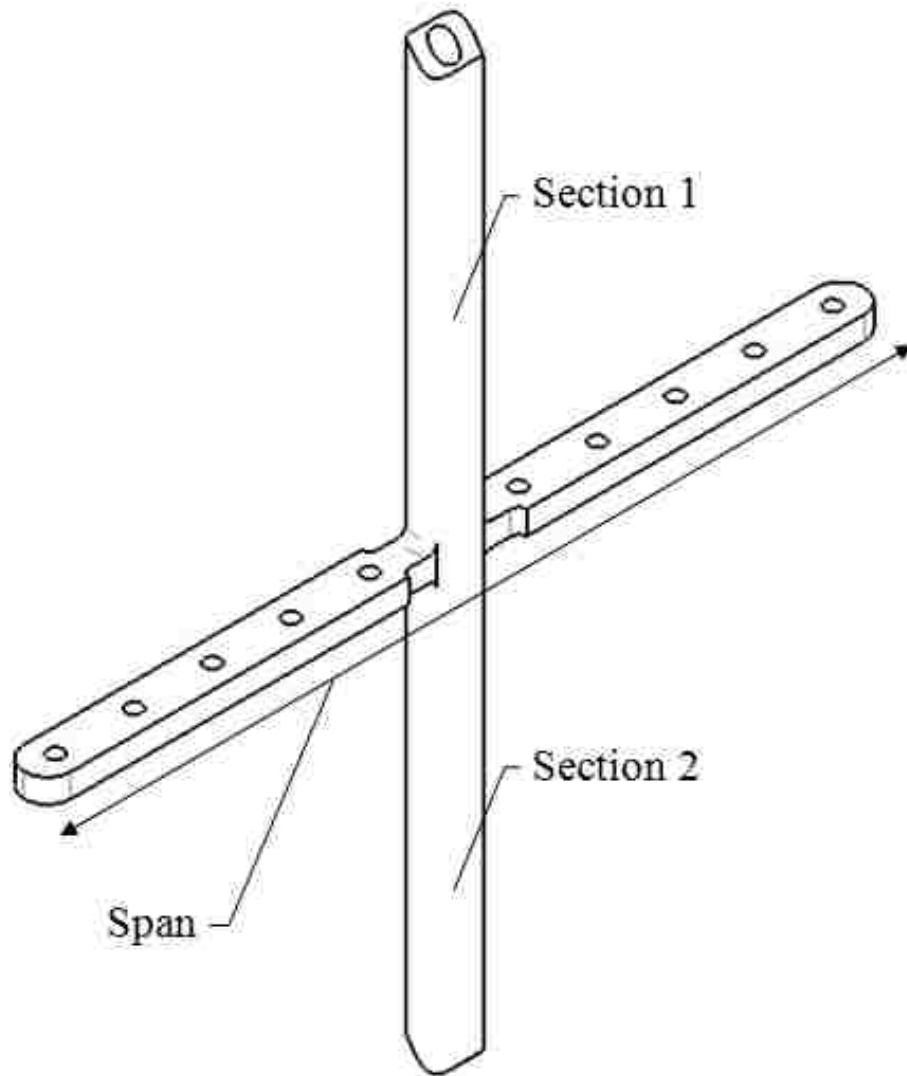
Isometric View. Bi-Cantilevered Drain/Cantilever System composed of a Circular Drain and two Rectangular-shaped Cantilevers. An Example of the First Drain/Cantilever System Type.
